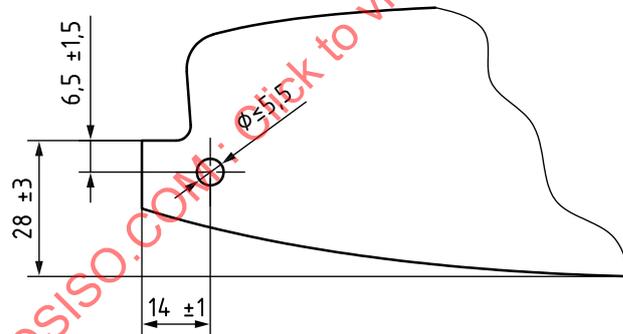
Boot with the position and dimensions of an example for cut outs allowed in the toe area
